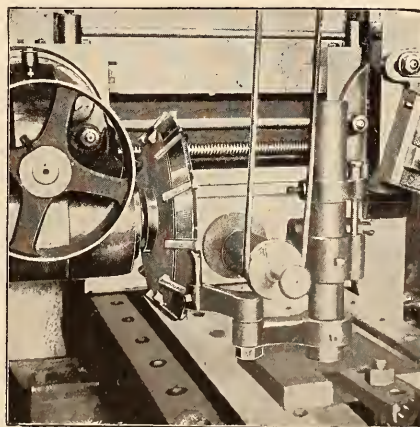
GRINDING CUTTERS ON A MILLING MACHINE.
